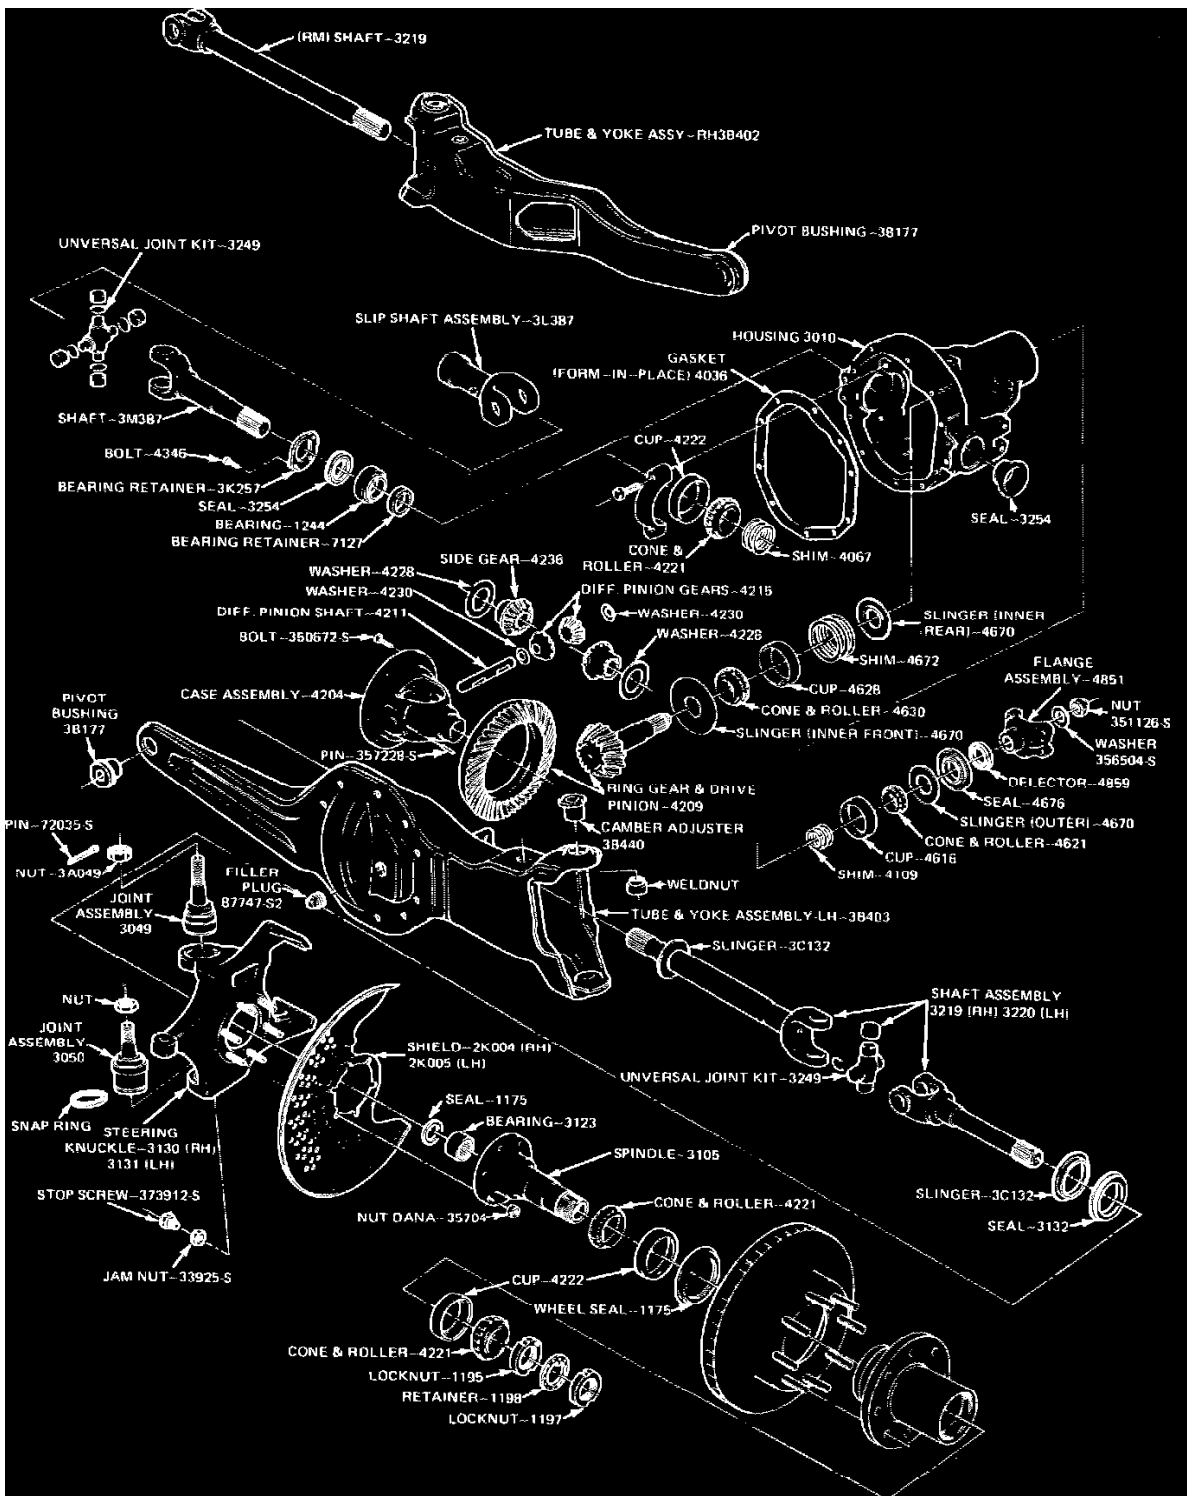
Disassembled view of Dana/Spicer model 44-1FS front drive axle
